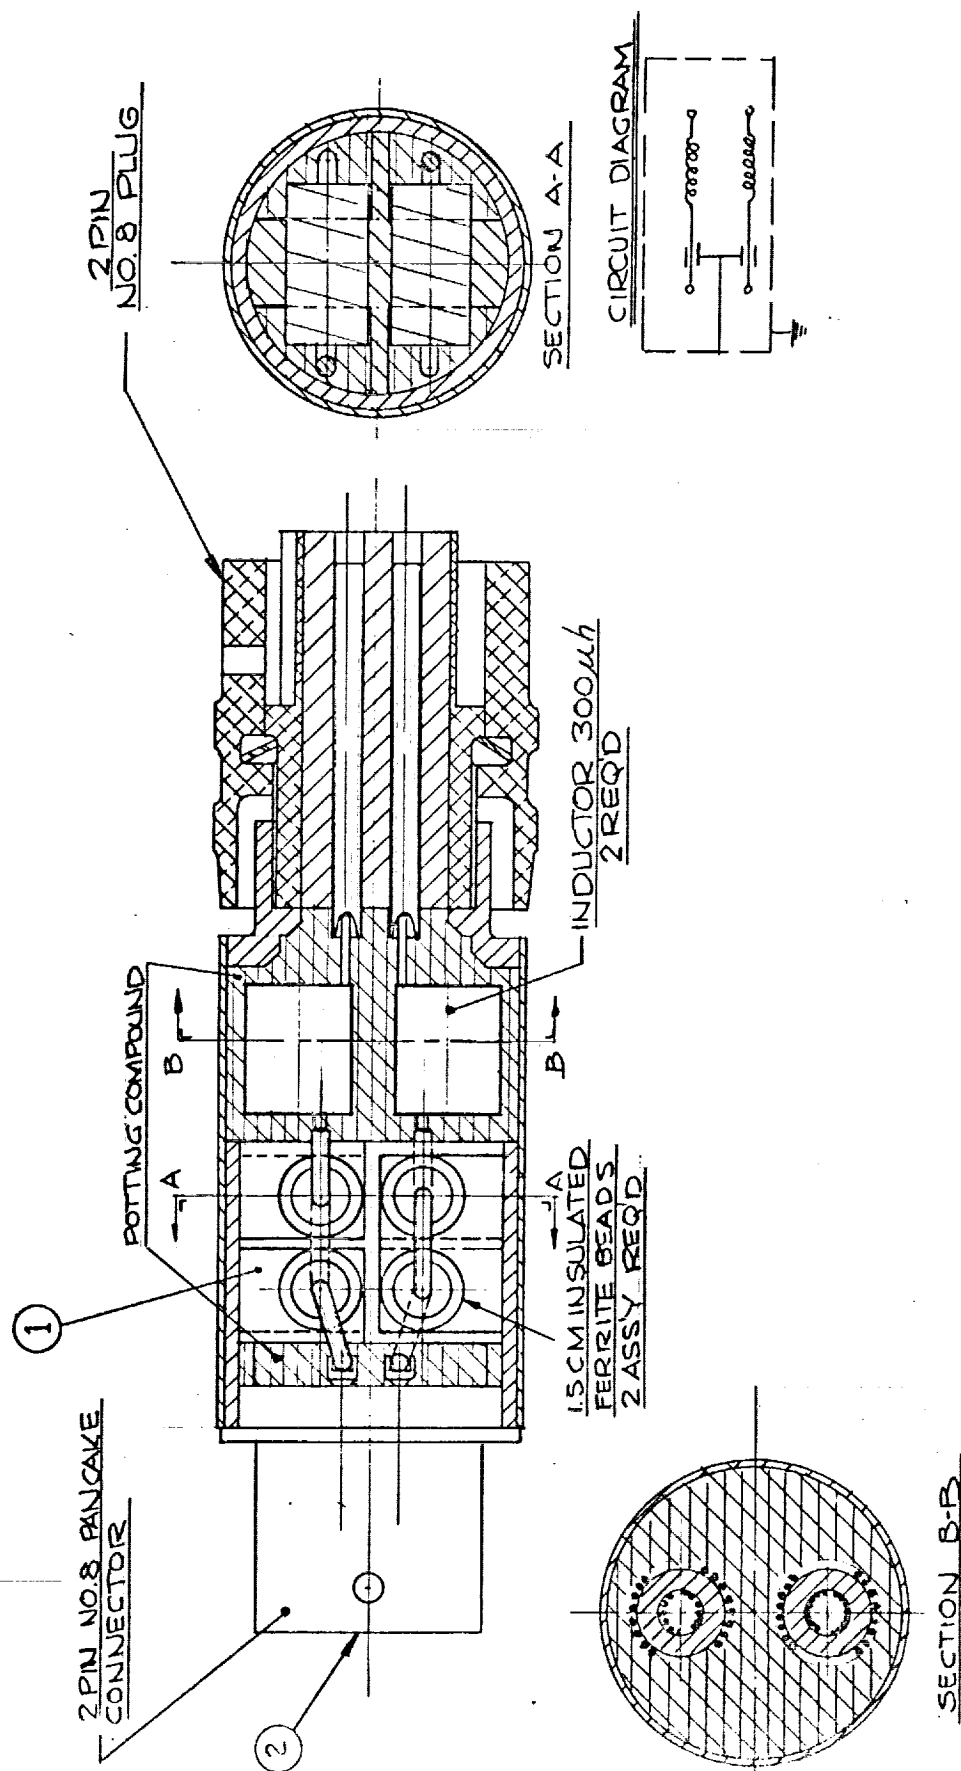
ASSEMBLY DRAWING OF 2-PIN HYBRID FILTER
